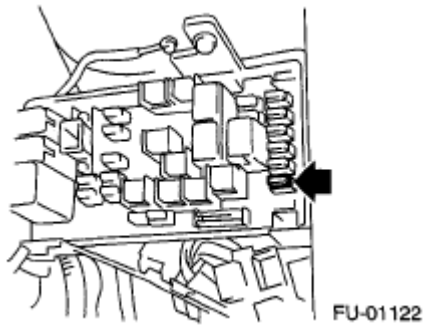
Identifying Fuse Of Fuel Pump To Main Fuse Box
